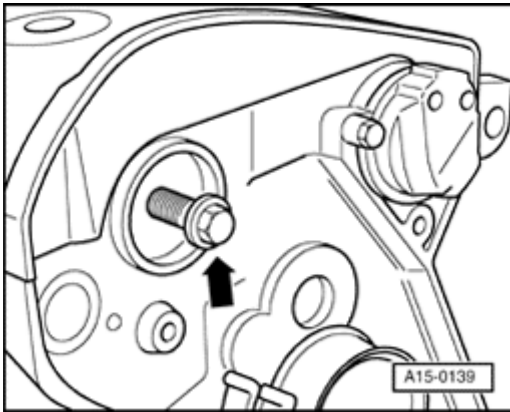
Camshaft Gear Retaining Bolt Installed Into Camshaft To Stop
